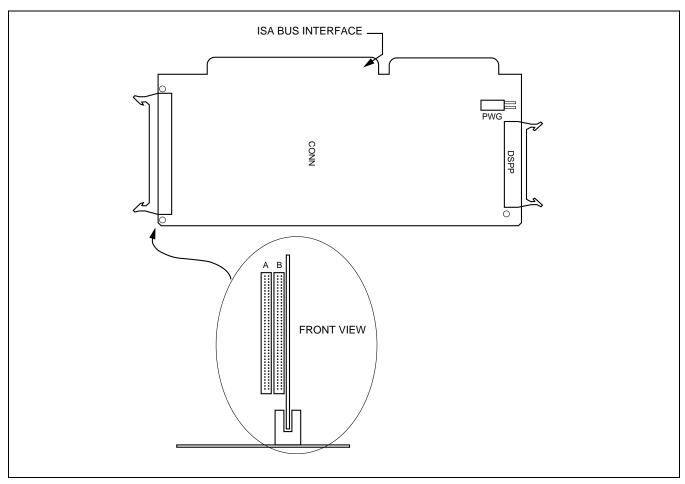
Face Layout of PZ-GT13 (ISAGT)
